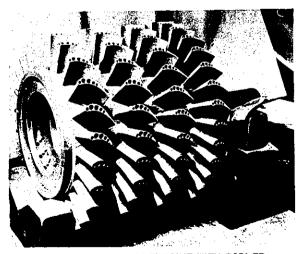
ROTOR OF A GAS TURBINE WITH COOLED BLADES BEFORE CLOSING BY WELDING THE HOLES IN THE BLADES
